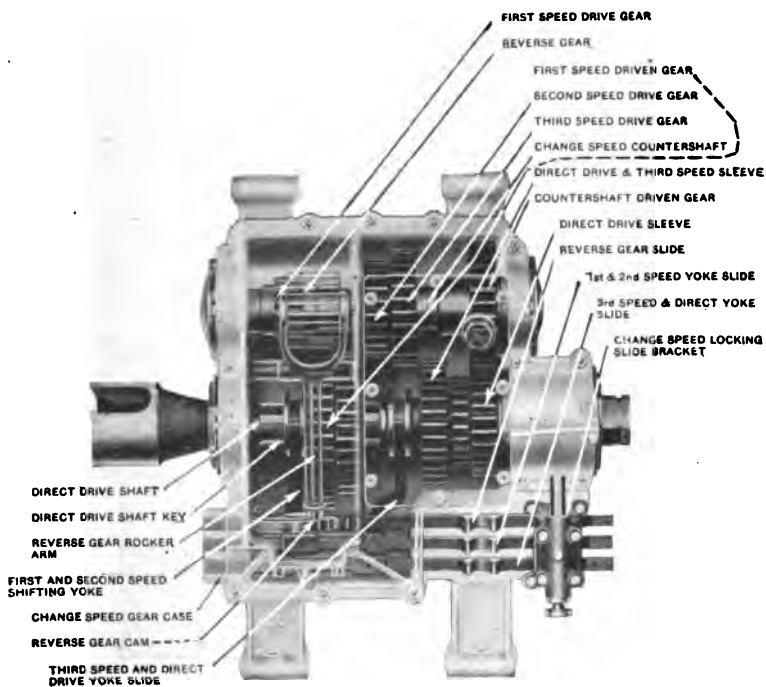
Speed-Changing Gear Set, Cover Removed.
